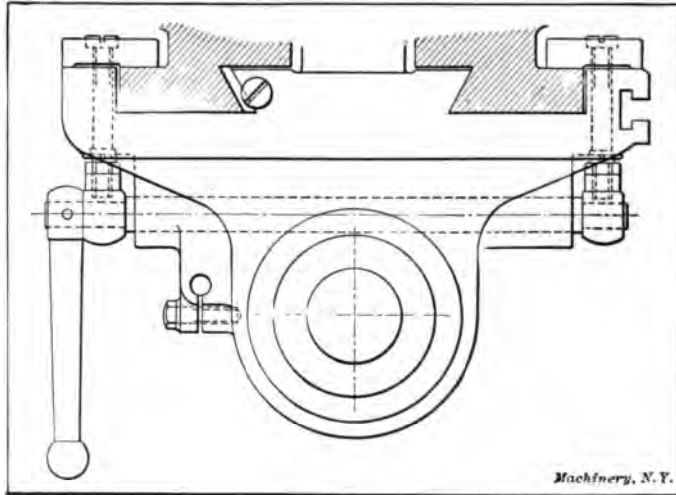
Eccentric Clamping Arrangement for Vertical Milling Machine Head
